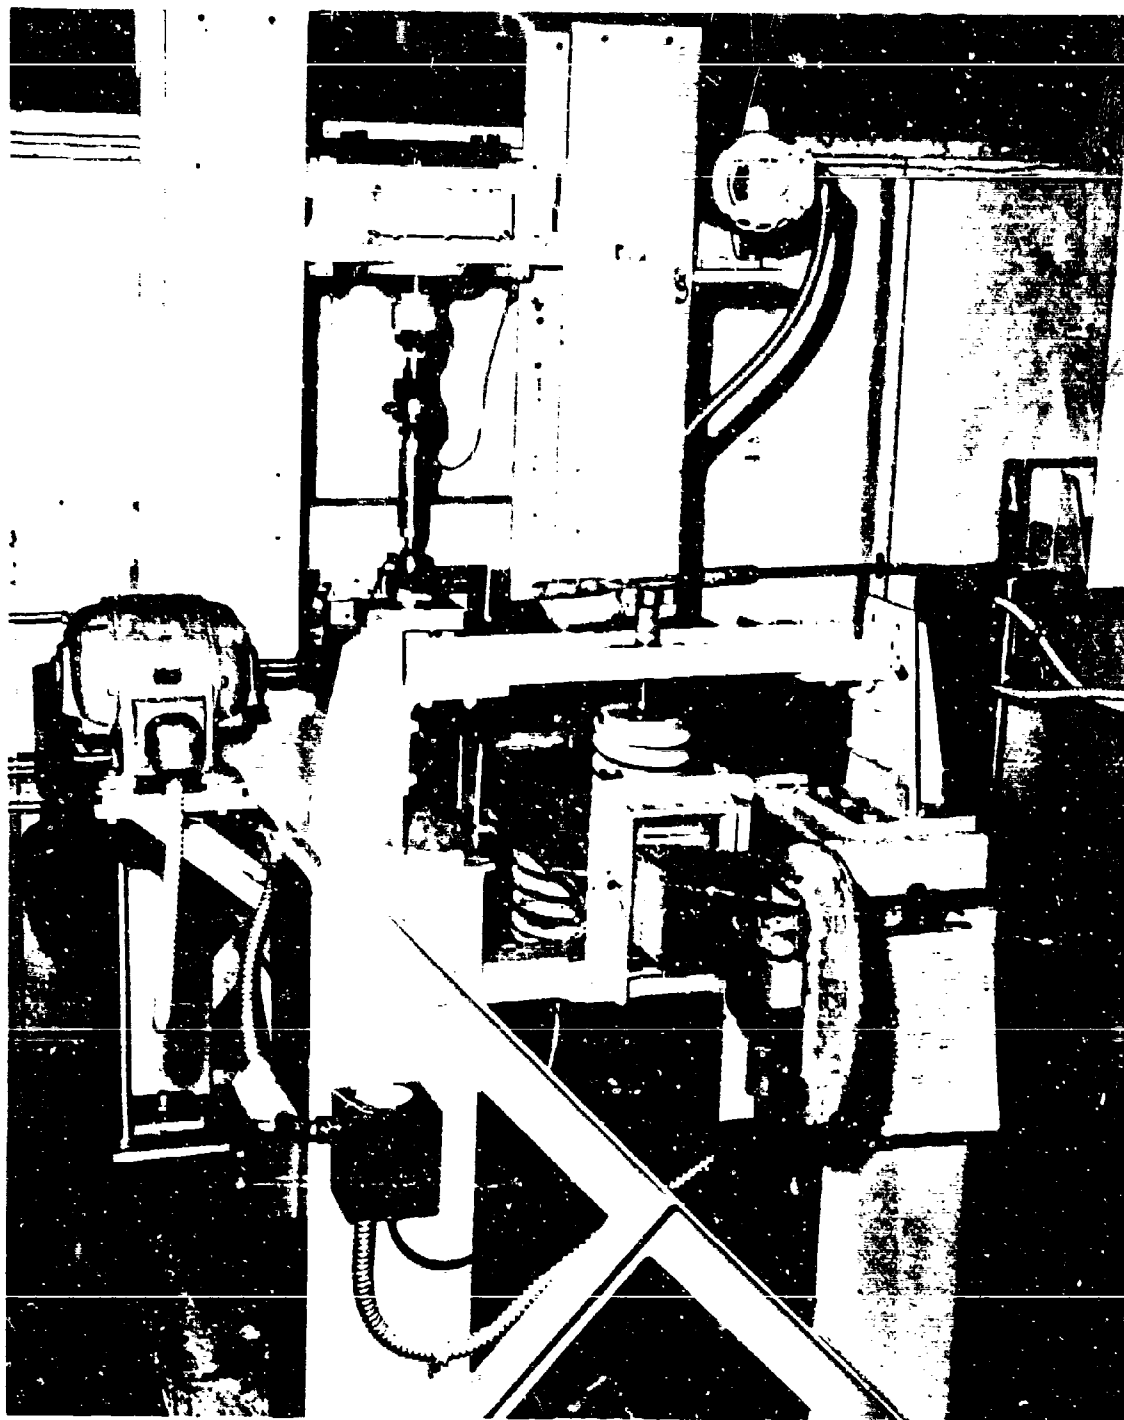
Rod End Specimen Installed in Fatigue Test Machine.
